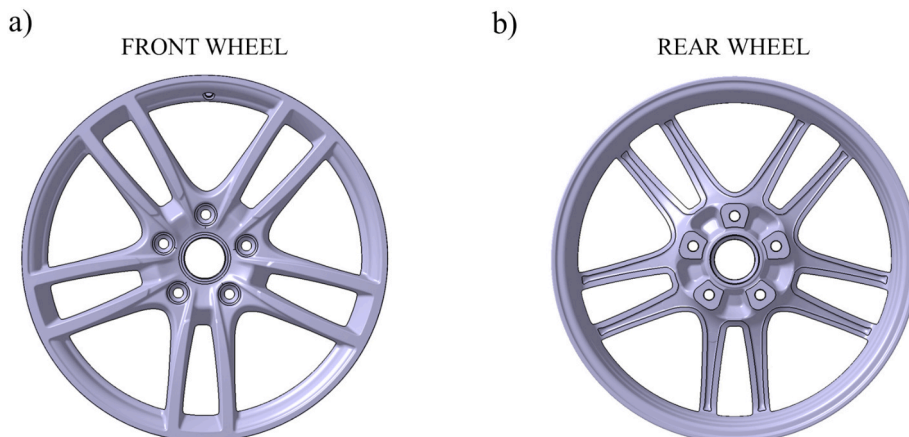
Wheel geometry used for the experimental and numerical analyses: a) front wheel; b) rear wheel.
